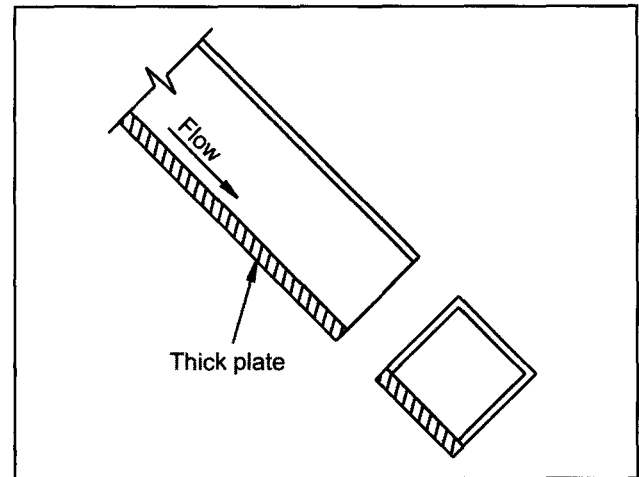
Chutes of belt conveyor should be angled according to trajectory of flow.
